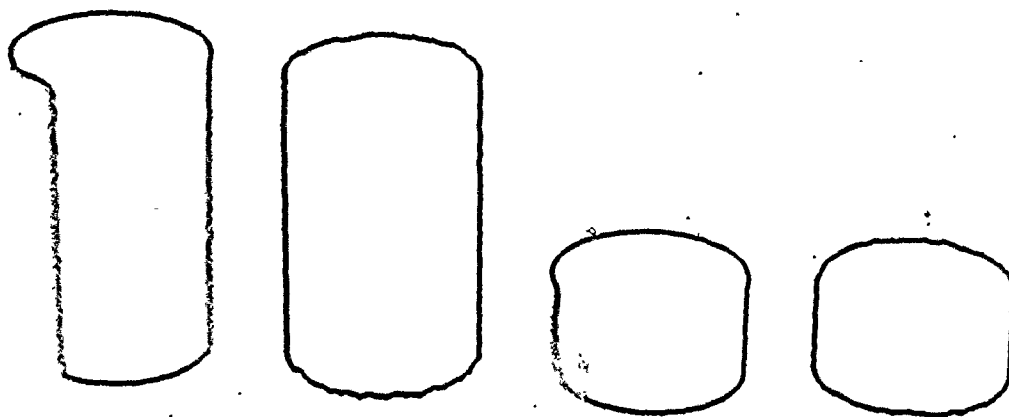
EFFECT OF USING COOLANT IN MACHINING ALUMINUM SAMPLES
